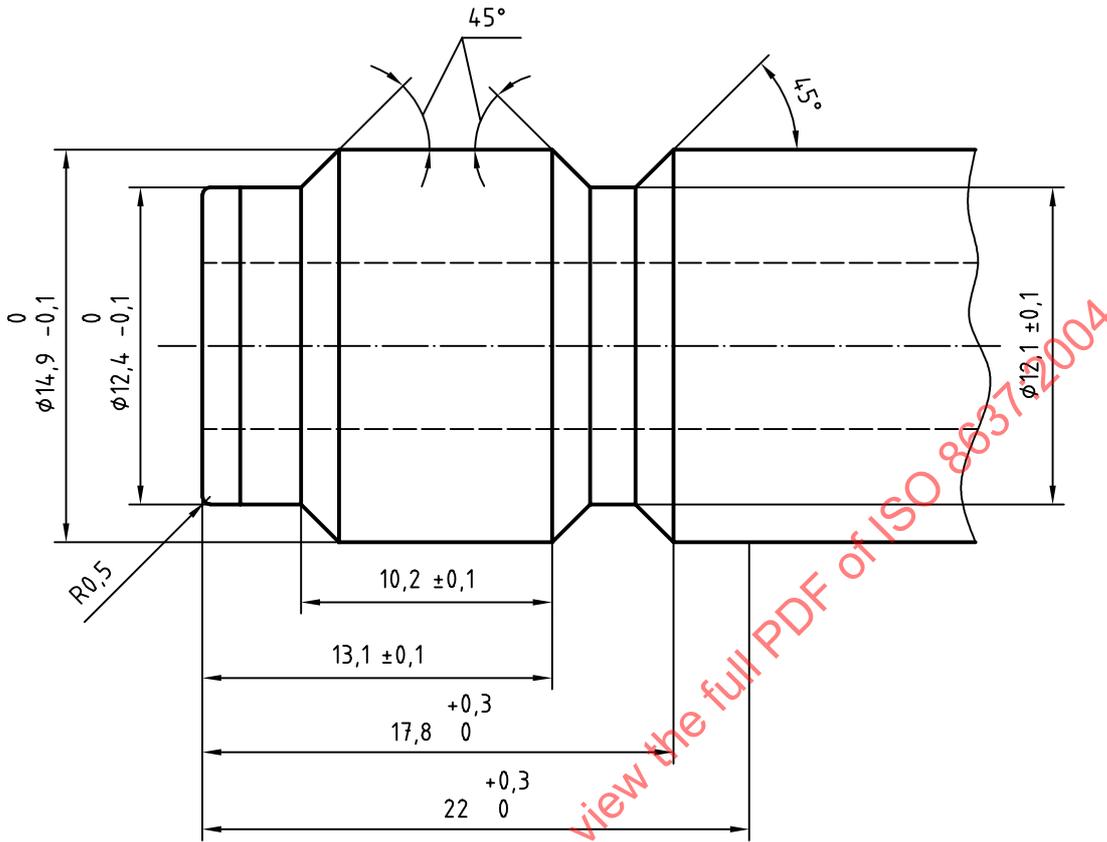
Main fitting dimensions of dialysate inlet and outlet port
